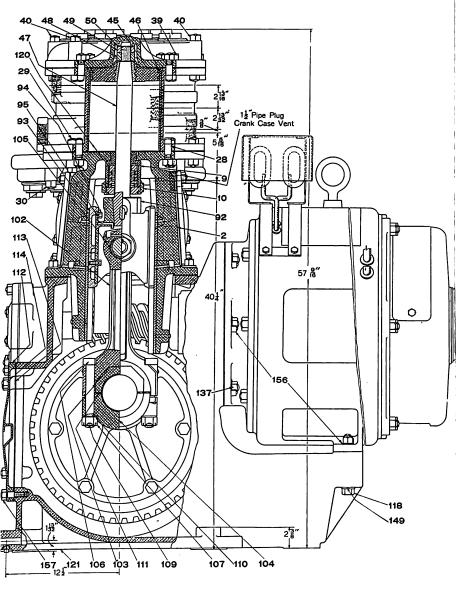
CA-150 Compressor, Section through the High Pressure Cylinder Showing Crosshead and Connecting Rod Details
